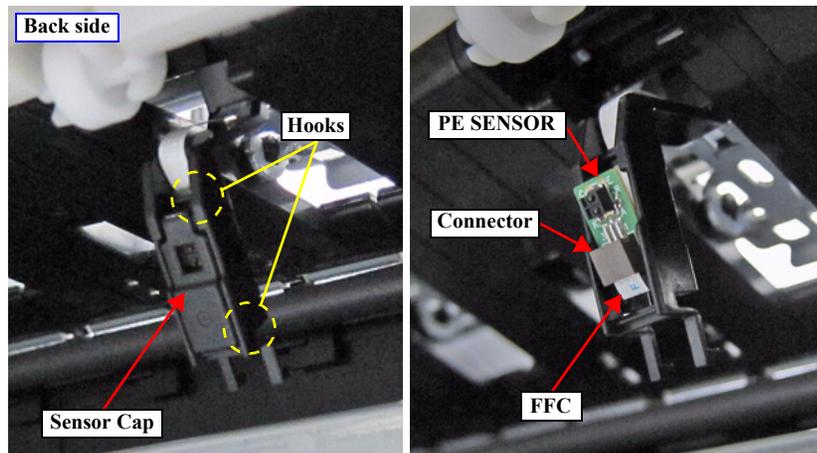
Removing the PE SENSOR (THICK PAPER)
